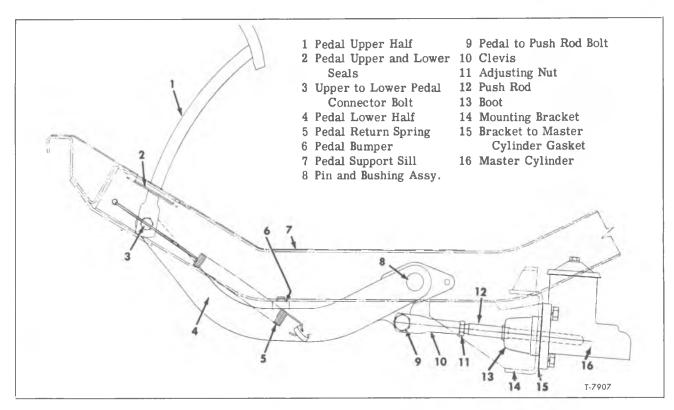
Brake Pedal and Master Cylinder Installation (Tilt Cab Models)
